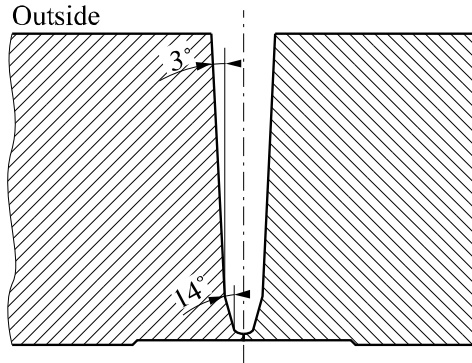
Narrow chamfer for orbital TIG welding
